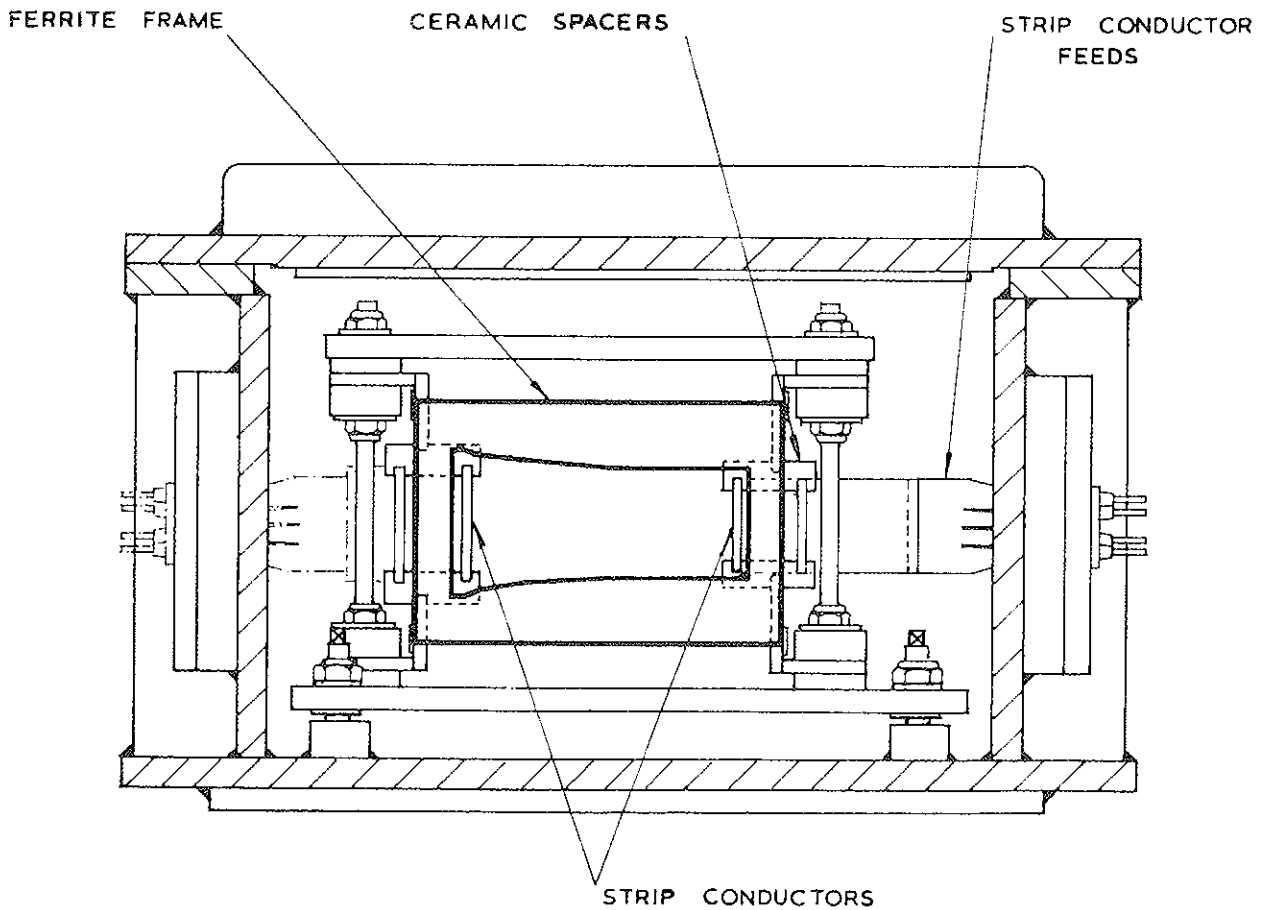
CROSS-SECTION OF INJECTOR ASSEMBLY
